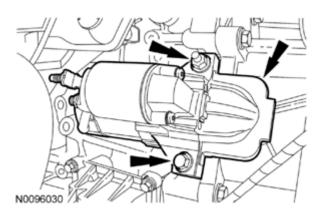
Locating Starter With Bolts And Studs Courtesy of FORD MOTOR CO.
